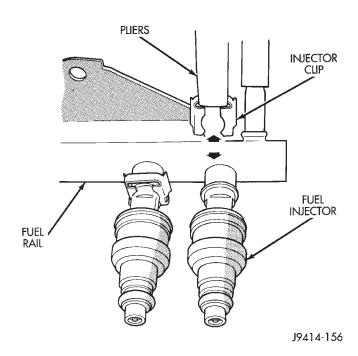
Injector Retaining Clips—Typical Injector FUEL TANK
